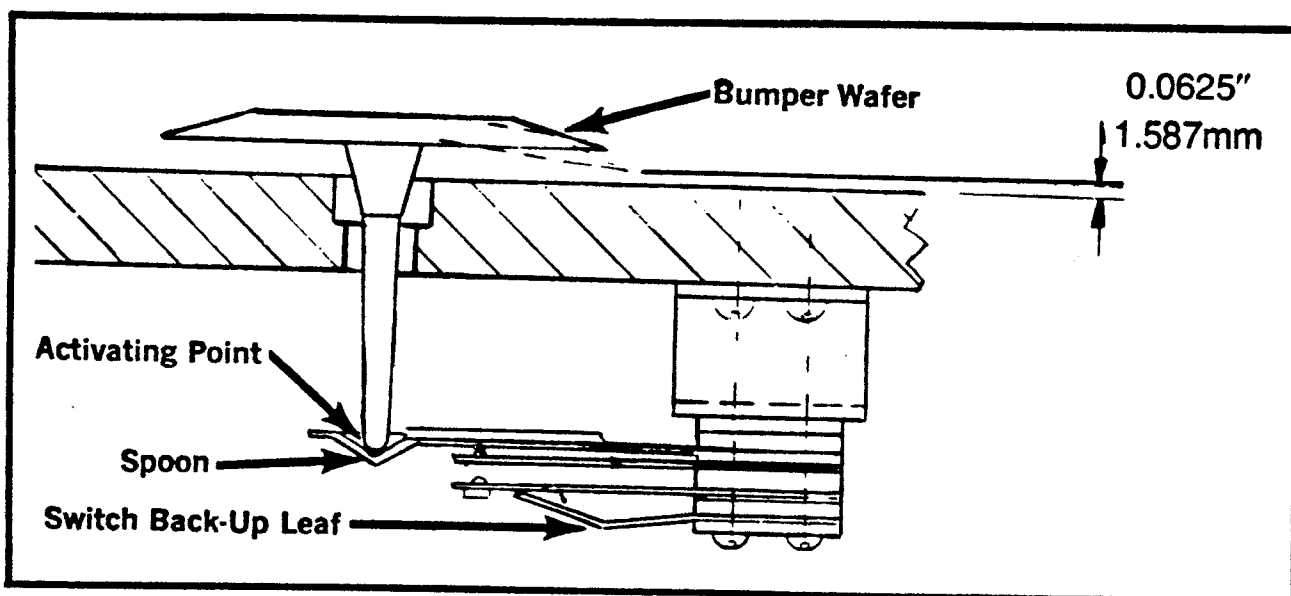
Thumper bumper switch adjustment. First center the switch spoon. Then bend the switch actuator to operate the switch within the specifications shown.
